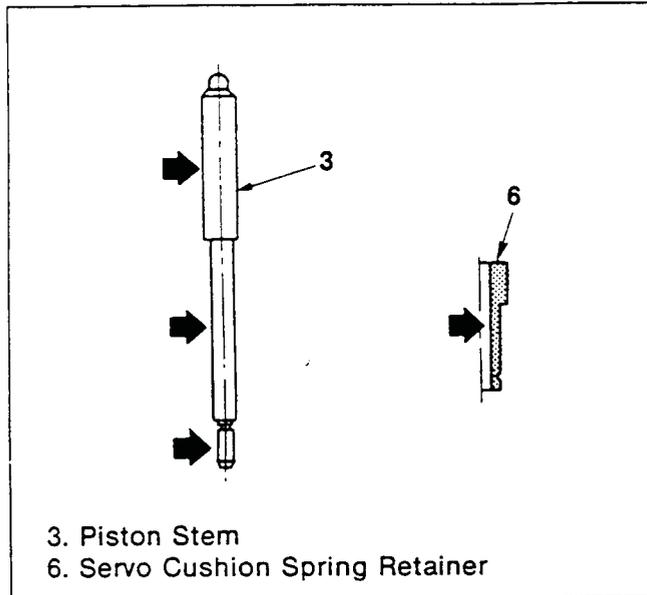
Piston Stem and Servo Cushion Spring Retainer Check
